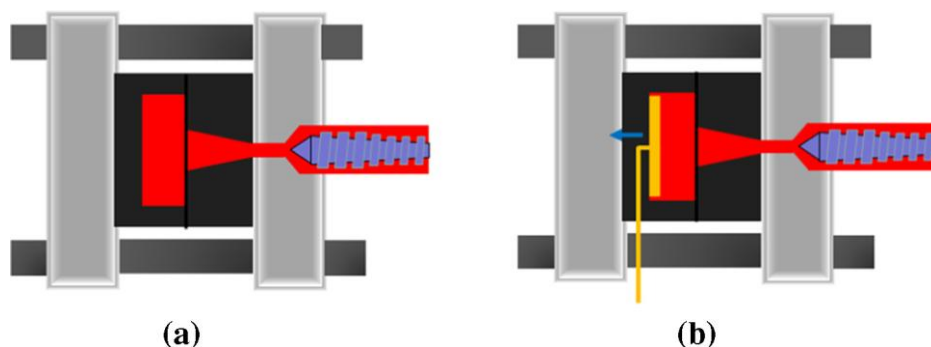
external Gas Assisted Injection Moulding(eGAIM)
